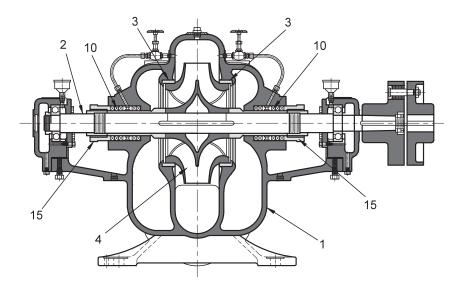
Sechmatic of a double-suction, single-stage centrifugal pump with shaft sleeves (numbers refer to parts listed in Table 3.14).
